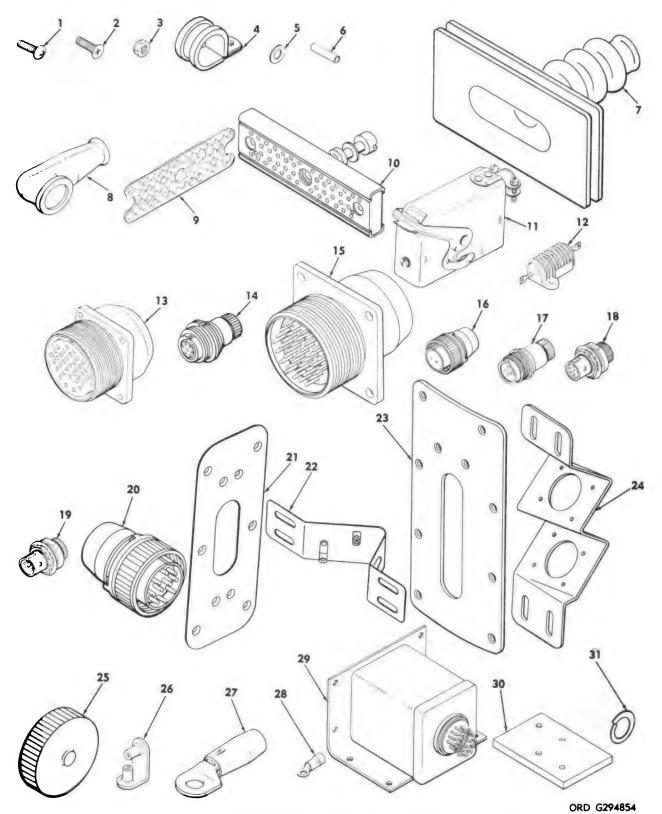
WIRING HARNESSES AND CABLE ASSEMBLIES
